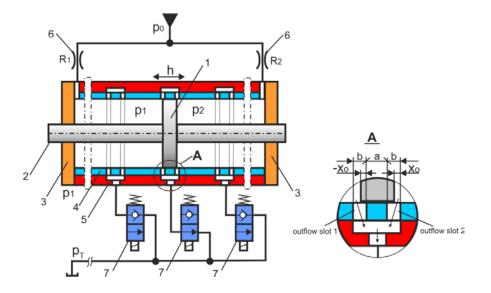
Solution of sensorless position control system of hydraulic linear stepper actuator: 1 - piston, 2 - piston rod, 3 - cylinder caps and, 4 - cylinder sleeve, 5 - cylinder, 6 - throttle valves,<math>7 - binary on/off valves
